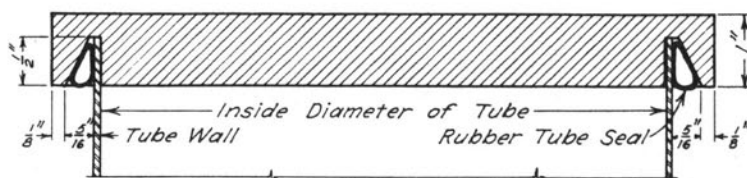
SECTION THROUGH ALUMINUM-TUBE BULKHEAD
